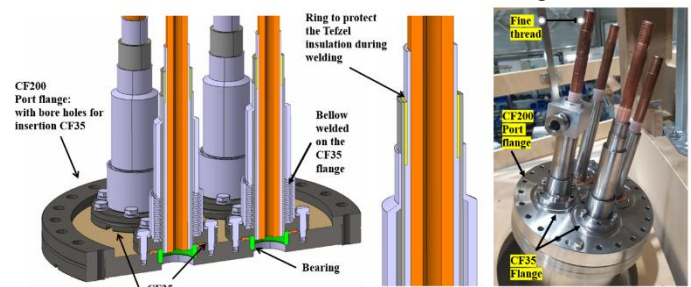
CAD model of the coil feedthrough is illustrated on the left-hand side; on the right-hand side the prototyping in the test mockup is shown.
